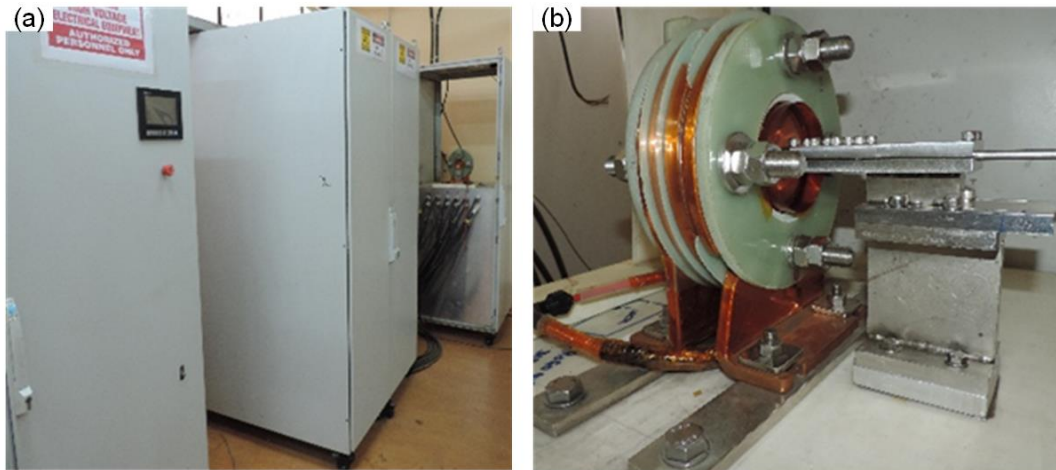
Machine used: (a) 70kJ/25kV magnetic welding machine, (b) Welding tool consisting of Bitter coil with disposable copper field shaper and
